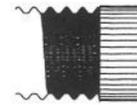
The bolt thread spiral from an AUTOCad DRAWING.
